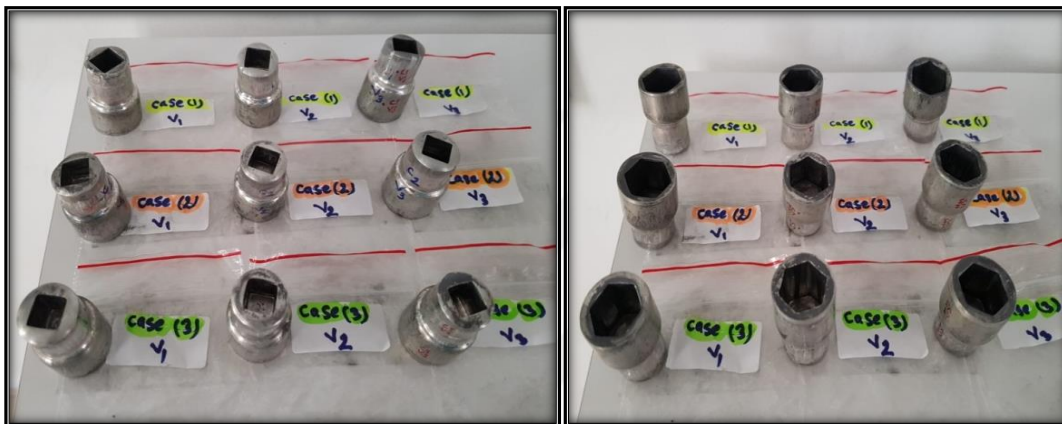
Samples for all cases: (a) Square side shape by forward extrusion; (b) Hexagonal side shape by backward extrusion
